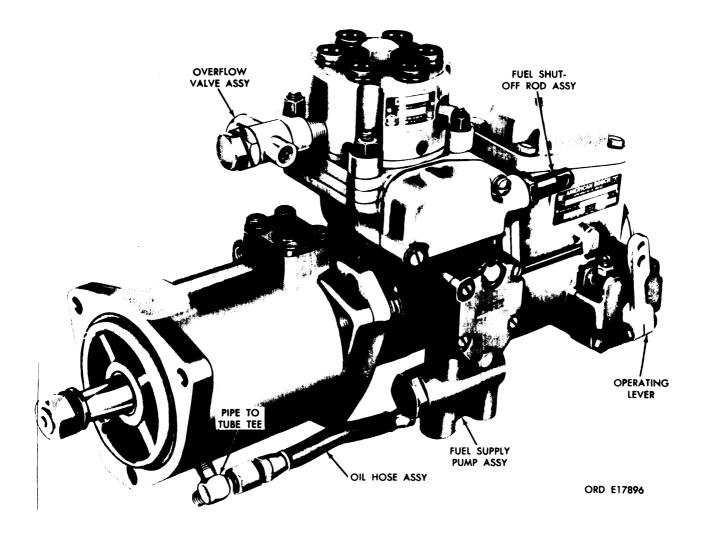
Typical metering and distributing fuel injection pump assembly (early code G), left front view.
